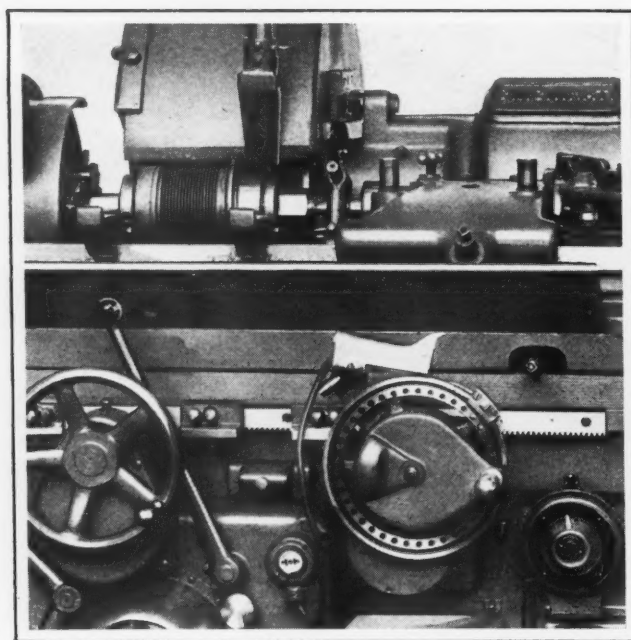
Grinding the Diameter and Flange Face of a Cylinder on a Plunge-cut Grinder with Automatic Sizing Device
